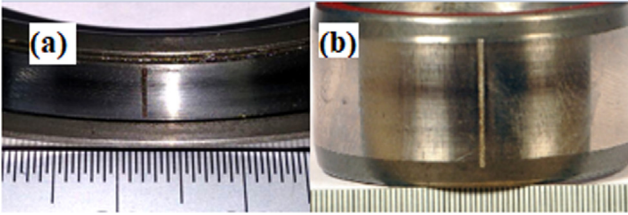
Photograph of defective components of cylindrical rolling bearing (a) Outer race (b) Inner race.
